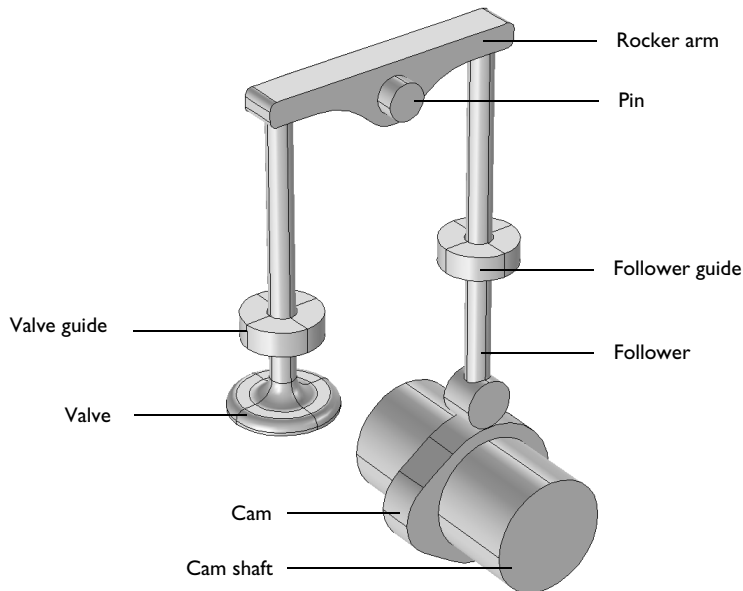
Geometry of a valve opening mechanism with a rocker arm and a radial cam.
